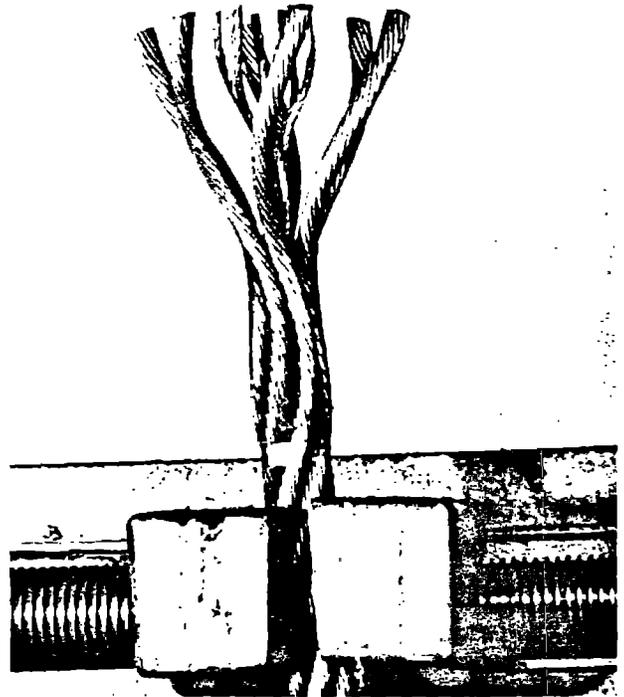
The "Coke Bottle" Shape of the Opened Wire Rope End.
